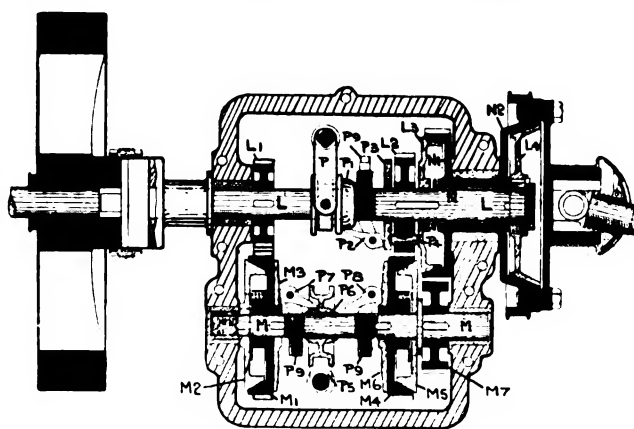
The 25-h.p. Winton Car. Sectional drawing Gear-box and Live-rear-axle, showing how the individual are arranged for operating each speed, and illustrating end-thrust is eliminated once any clutch is engaged
